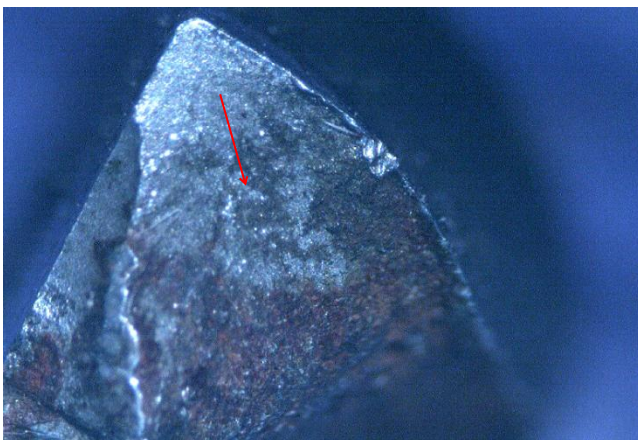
Fracture face:2 Premature fatigue failure and shotpeening coverage worn out at the initiation (10X)
